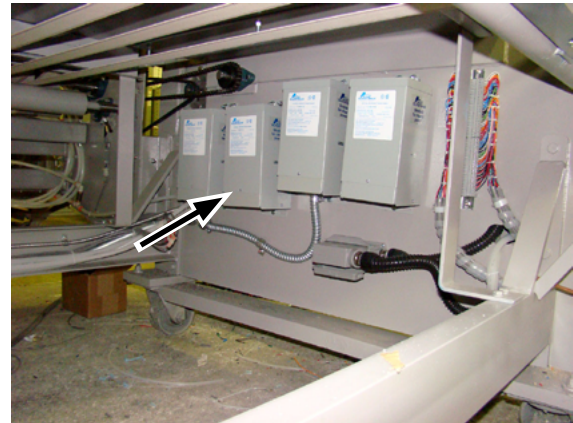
Step-down transformers are mounted near the bottom of the right endframe.
